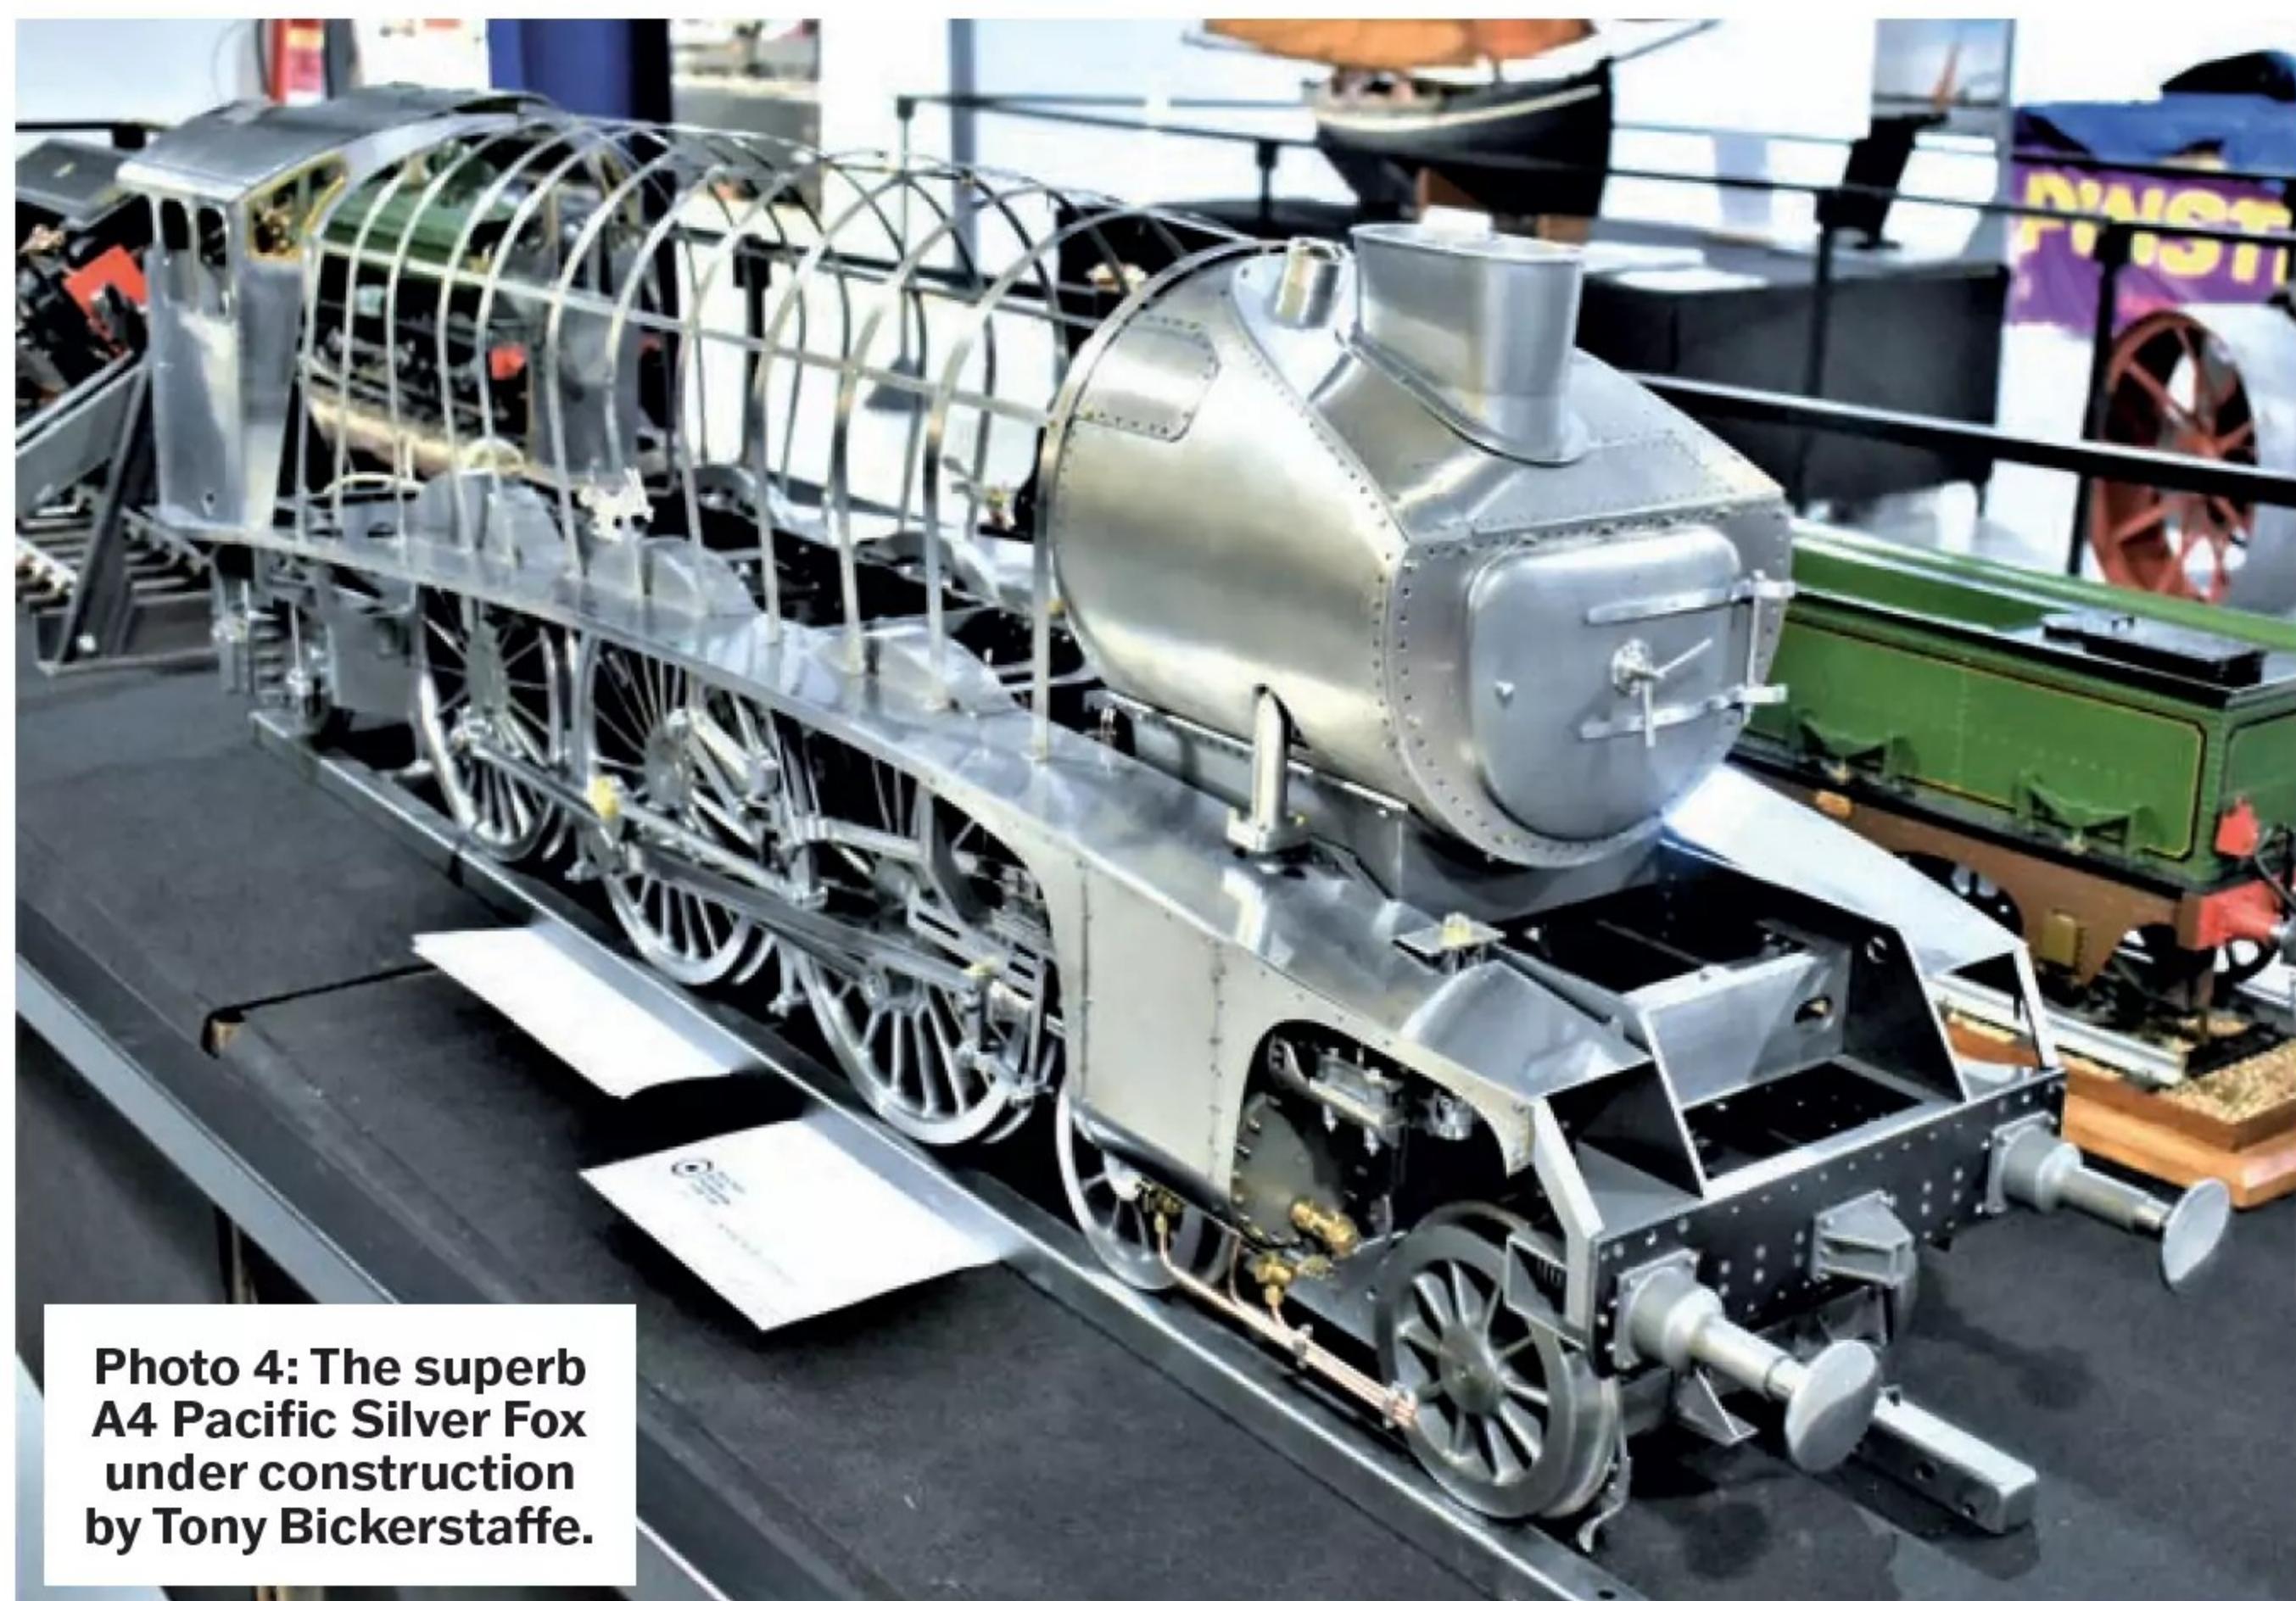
The superb A4 Pacific Silver Fox under construction by Tony Bickerstaffe.
